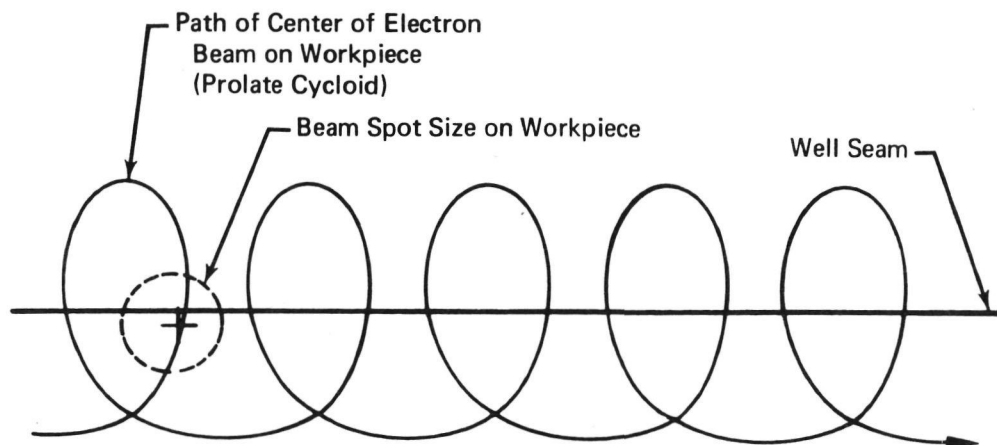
Electron Beam Weld Pattern Using Beam Deflection Coil
